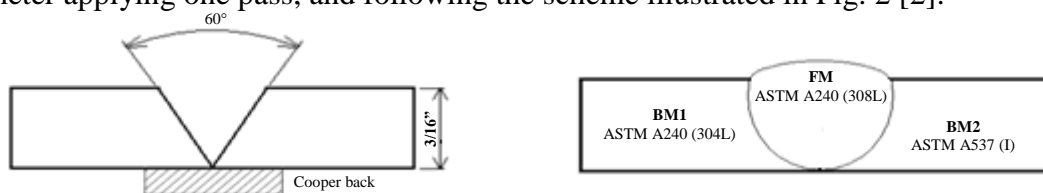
Setting the weld, bevel and location of the materials involved.
